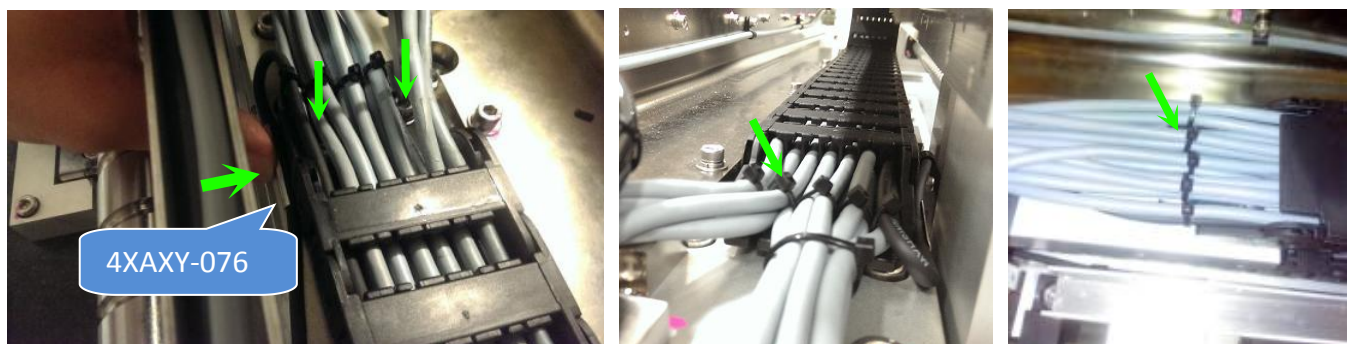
Stepper Motor Cable Routing (X Axis E-Chain)
